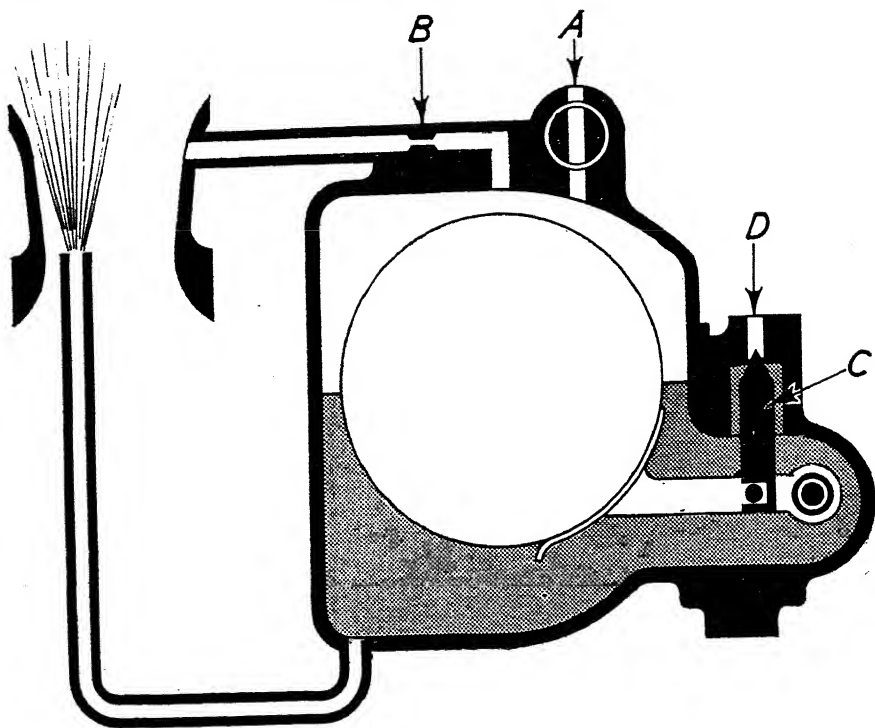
ARRANGEMENT USED IN STROMBERG CARBURETTORS
